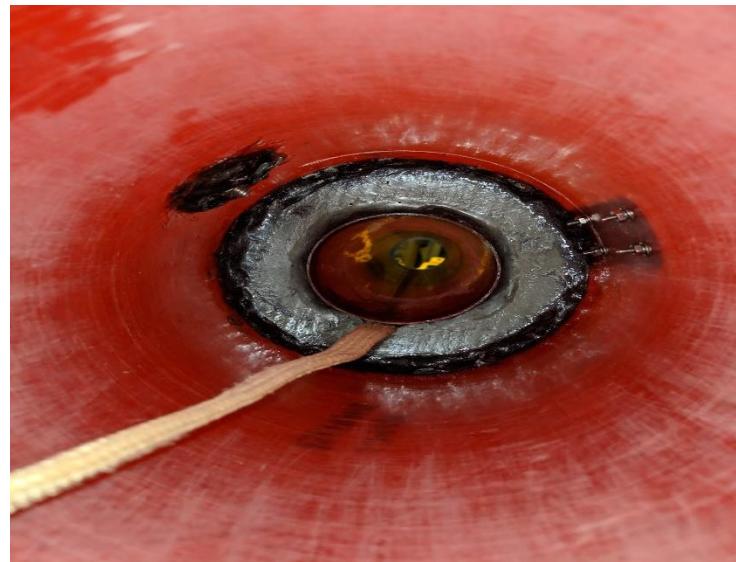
As-built interior of lower airframe, showing securement of forward centering ring, rail lug interior weld nut, drogue shock cord, and camera mount.
